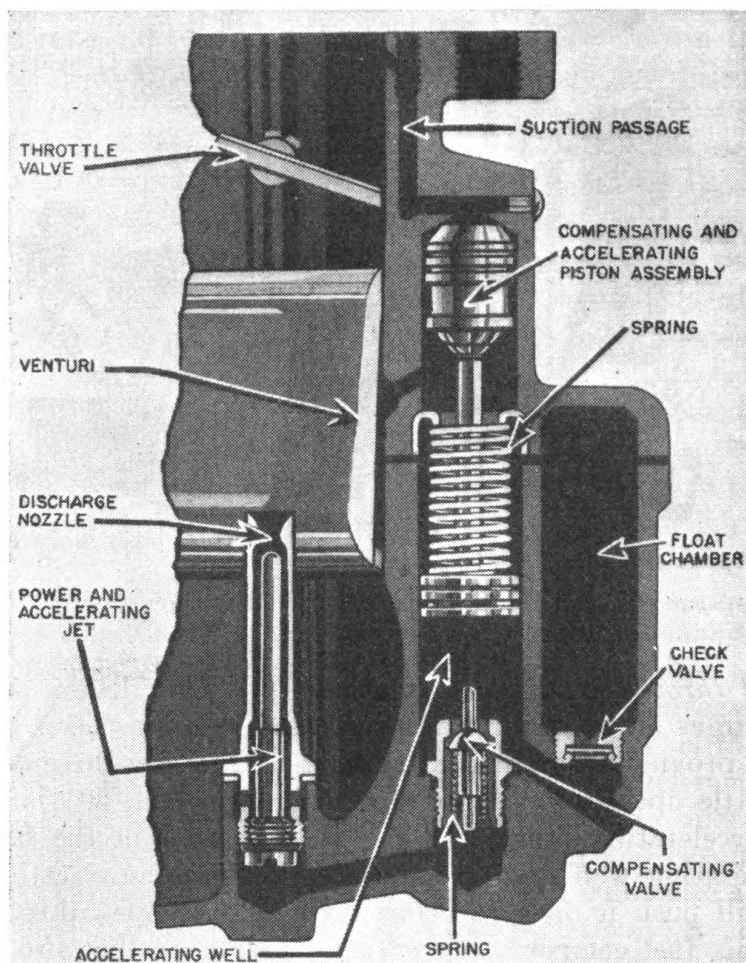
Section through a compound nozzle type carburetor, showing accelerating pump and full throttle compensating valve assembly.
